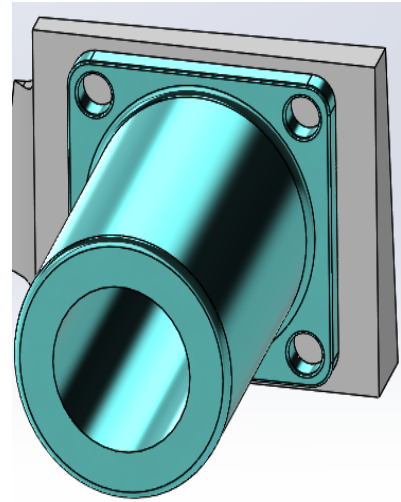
SECTION VIEW OF WHEEL HOLDER (ACTUAL PART)
